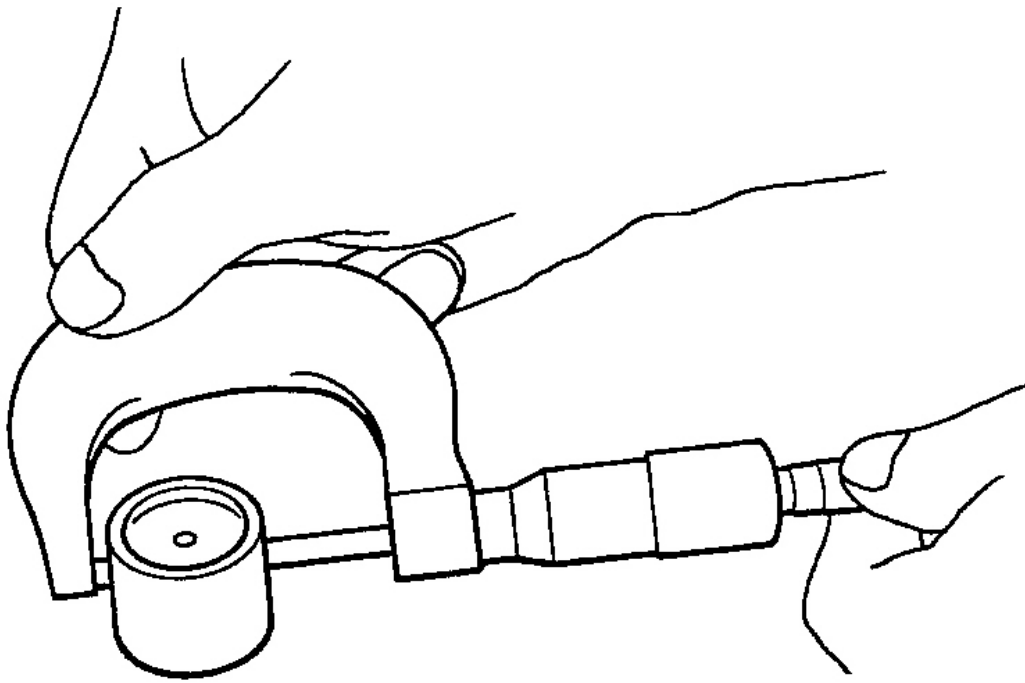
Identifying Valve Lifter and Adjusting Shim
